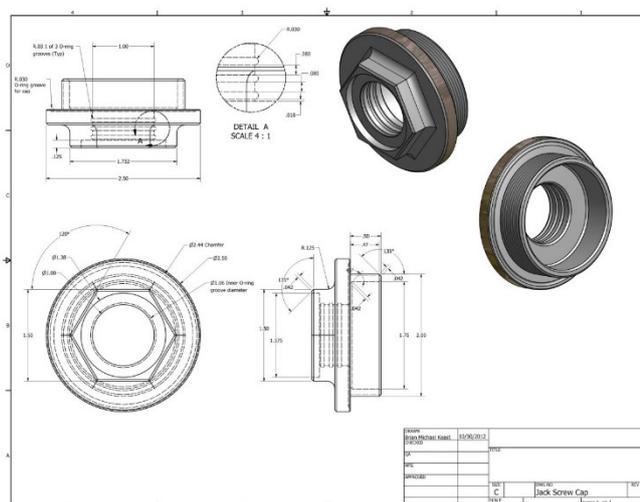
Example of CAD drawing: screw cap with technical drawings and dimensions (Courtesy: <http://www.idrawdreamsforinventors.com/portfolio-items/technical-drawings/>)
